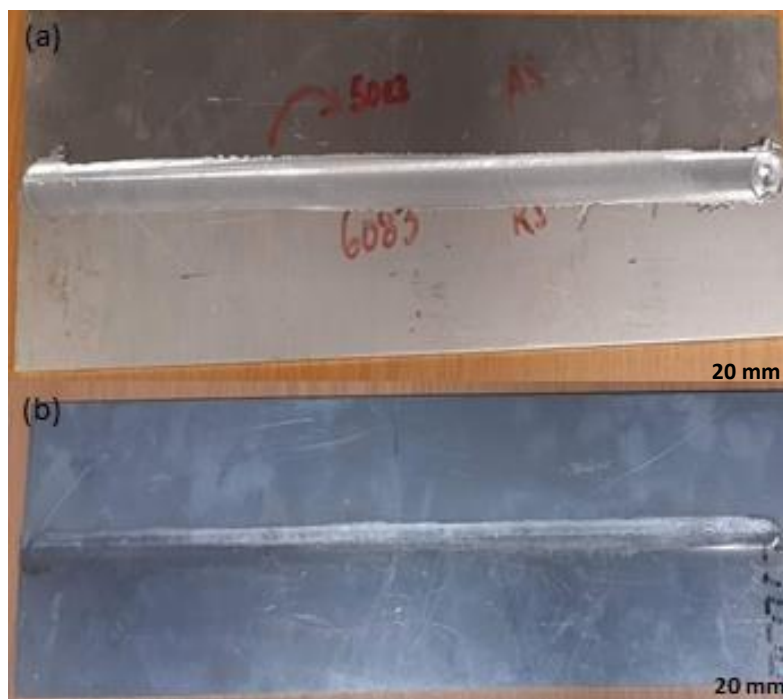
Welded blanks (a) face and (b) root
